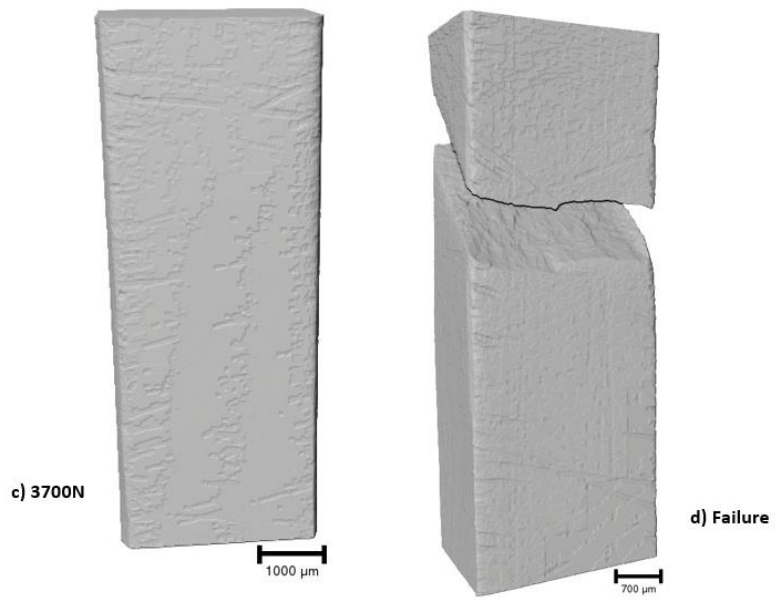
Three-dimensional XCT view of the gauge section at 3700N load and at failure
